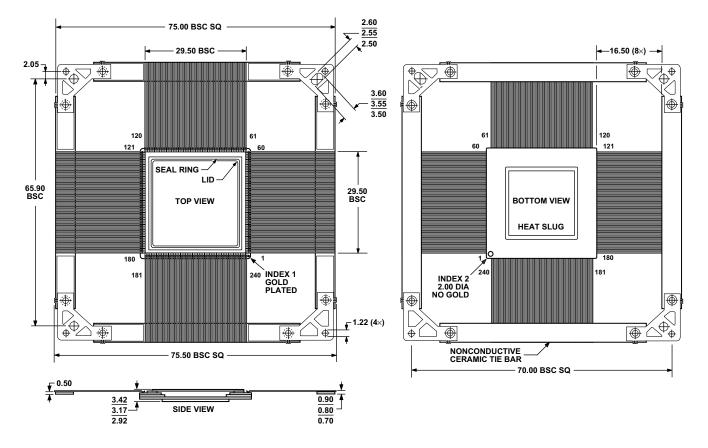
240-Lead Ceramic Quad Flat Package, Mounted with Cavity Up [CQFP] (QS-240-1B) Dimensions shown in millimeters
